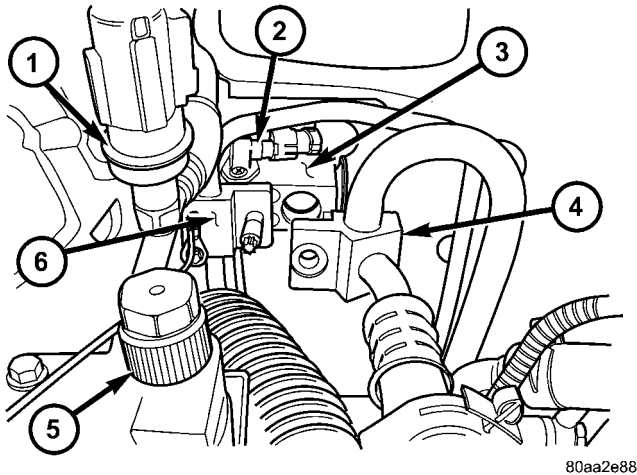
A/C Expansion Valve - LHD Shown, RHD Typical
